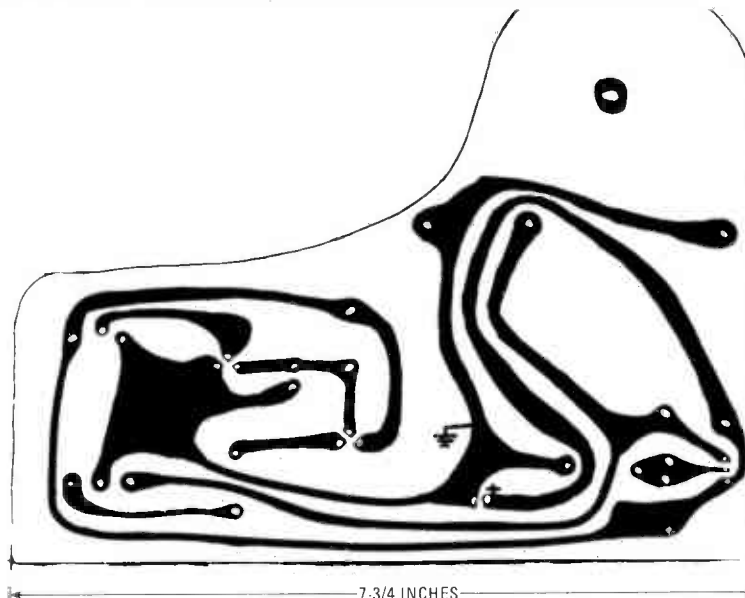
BOARD FIVE is shaped to fit the rear of a piano-shaped case. If a speaker is mounted on this board, the large hole at the top of the pattern will have to be further enlarged so that the speaker's magnet-housing fits snugly (see text).
